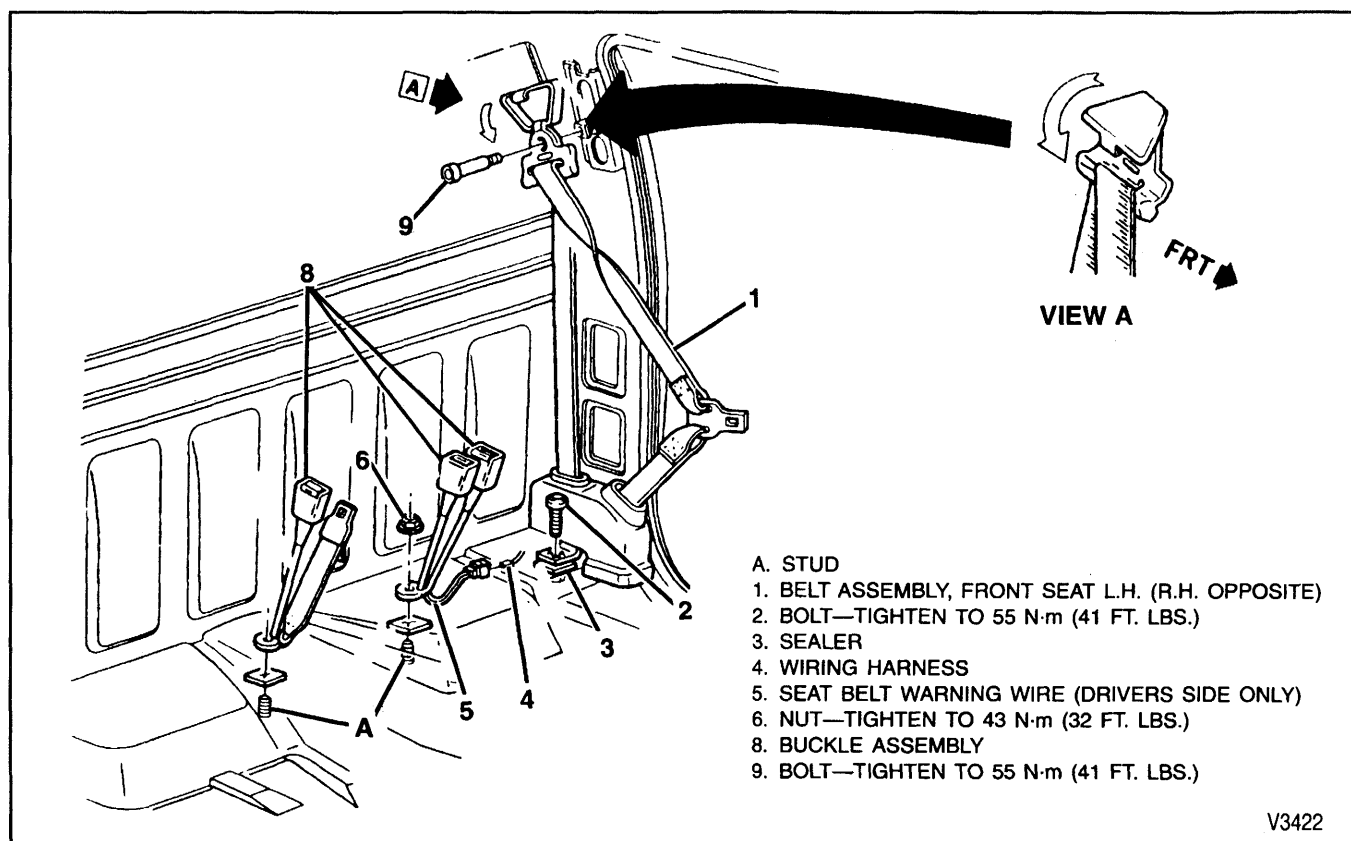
Front Seat Belts (Regular Cab with Bench Seats)
